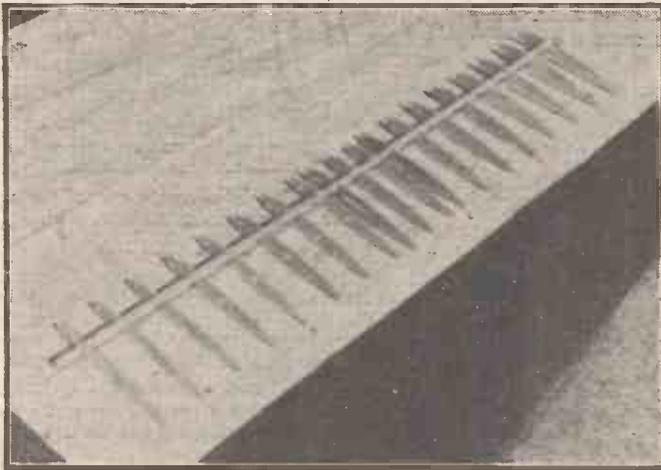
The first stage is to cement in the ribs to the bottom spar over the plan, and then add the top spar. A piece of grease-proof paper is interposed to prevent cement damaging the plan.
